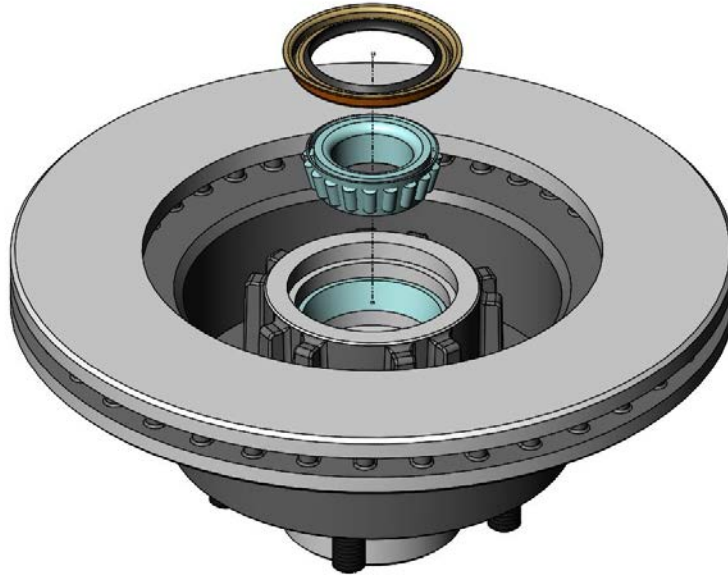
Inner Wheel Bearing and Grease Seal Installation
